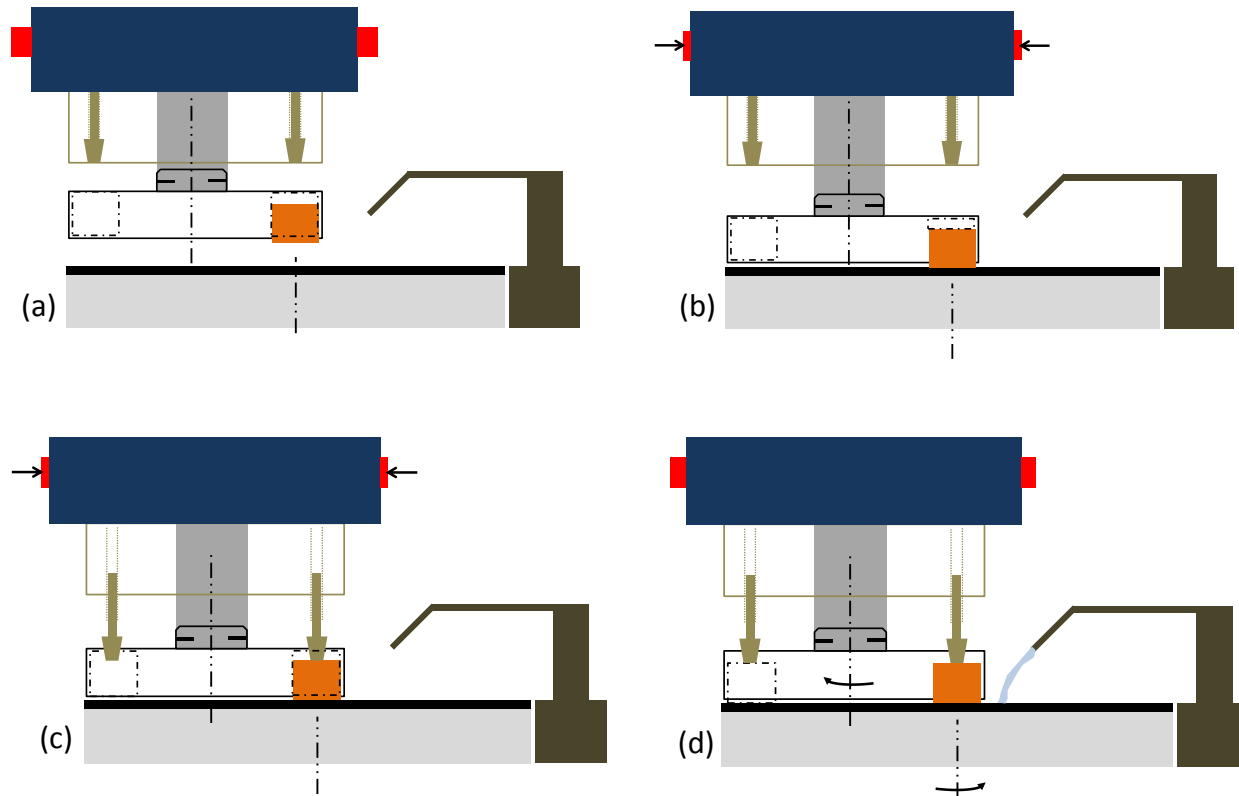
Sequence of operations just prior to start of polishing (a) Workpiece is loaded on the spindle along with the sensor (not shown) (b) The spindle is lowered onto the platen by means of the linear drive motor along a gear and pinion rack (c) The pneumatic system is activated, and applies the set downforce, after a delay of ~1 seconds the polishing action (d) begins with slurry being dispensed synchronously. The sequence operates in reverse after the end of polishing.
